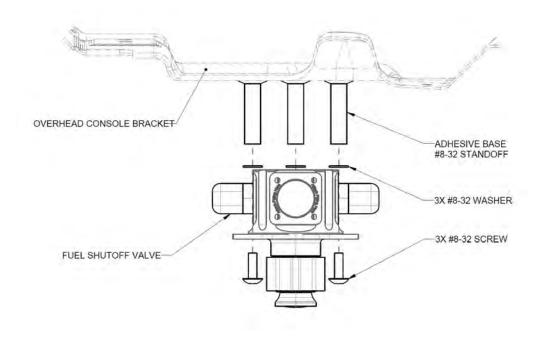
FUEL SHUTOFF VALVE HARDWARE
